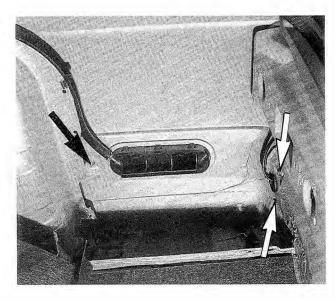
Mounting nuts and bolt inside trunk (arrows) for right rear side piece on three-piece bumpers. Left side is similar. Additional mounting bolt and nut are at rear edge of wheel housing.
